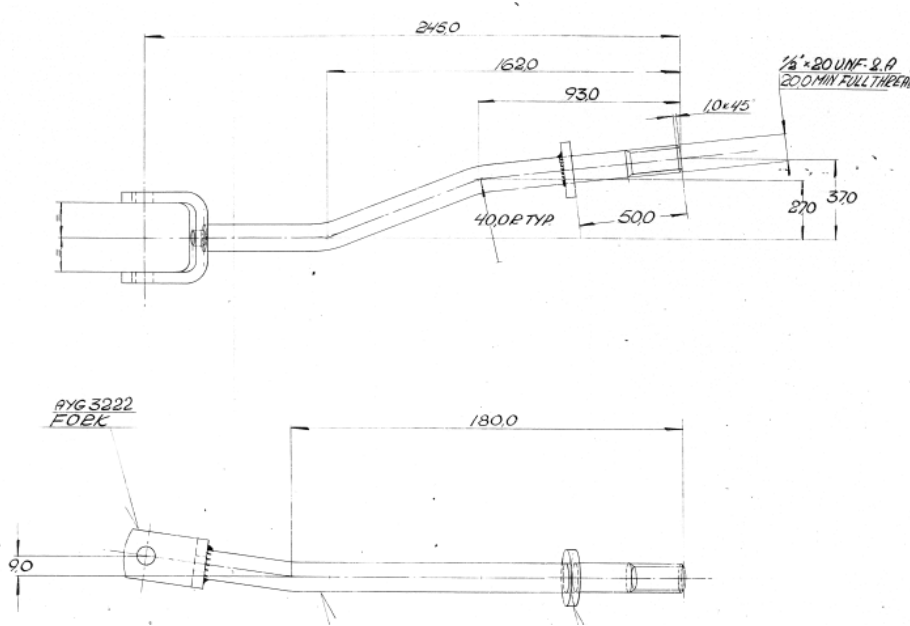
Steady shaft AYE2059.
